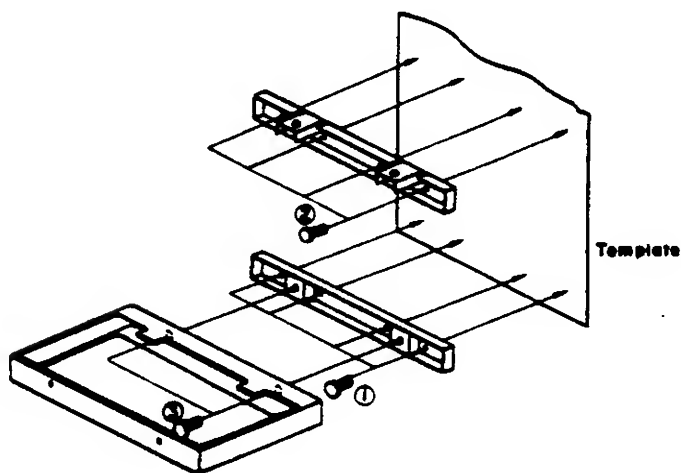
Wall Mounting Bracket and CCU Base Panel
